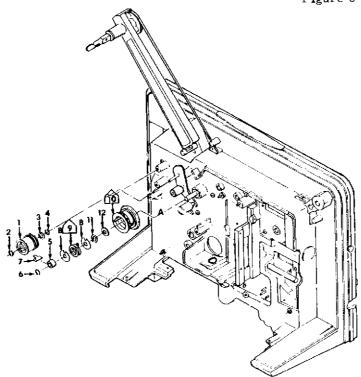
REMOVAL AND REASSEMBLY OF TAKE-UP SPROCKET
